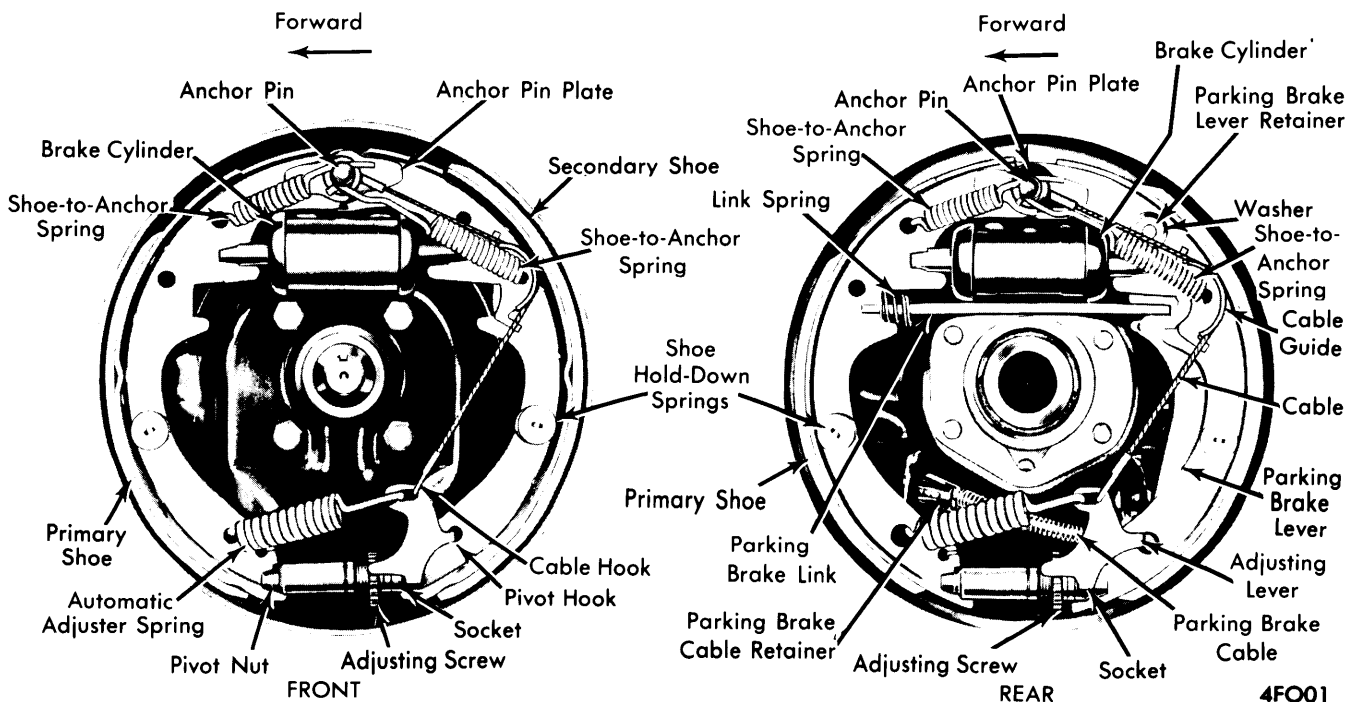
Sectional View of Automatic Adjuster Brake Assembly (Light Duty Vehicles)
